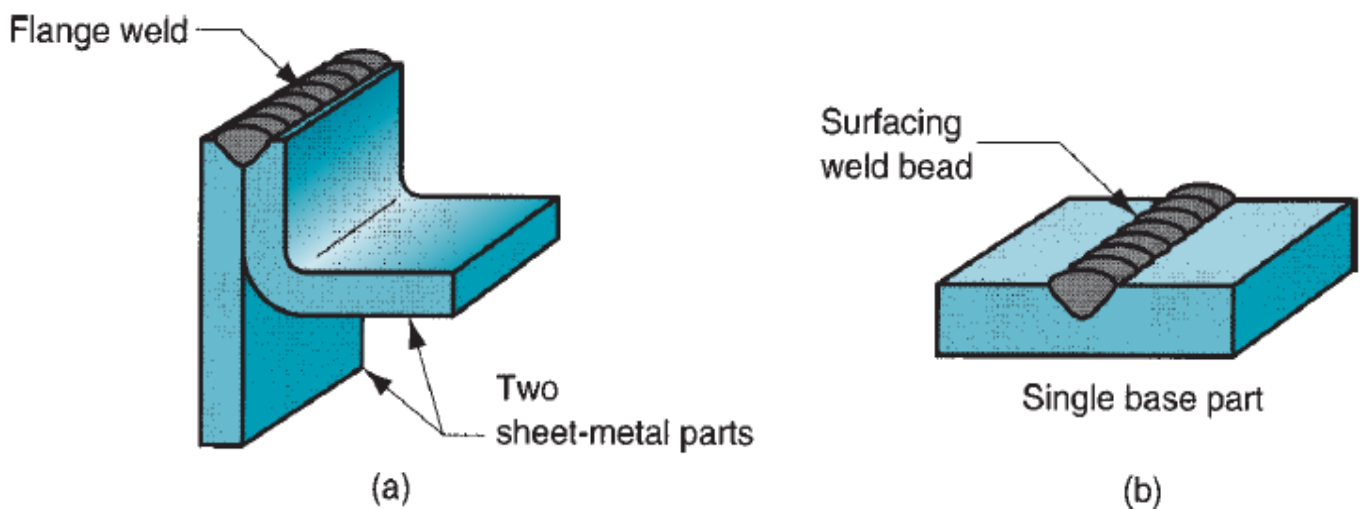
(a) flange weld, and (b) surfacing weld
